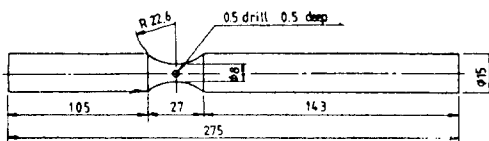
Shape and dimension of fatigue test specimen (unit : mm)
